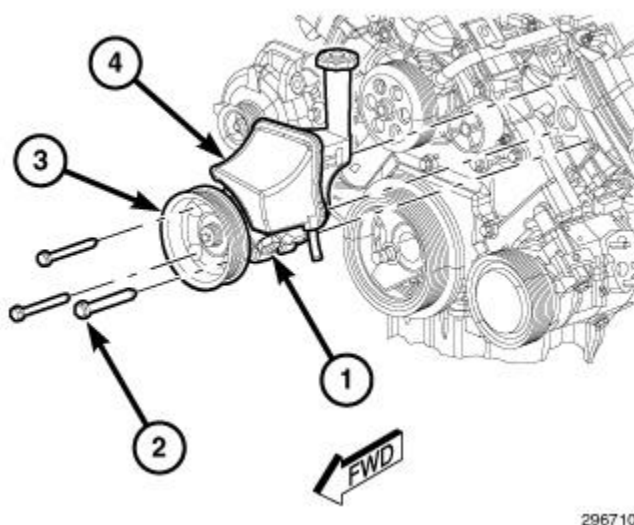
Power Steering Reservoir, Pump, Pulley & Bolts
